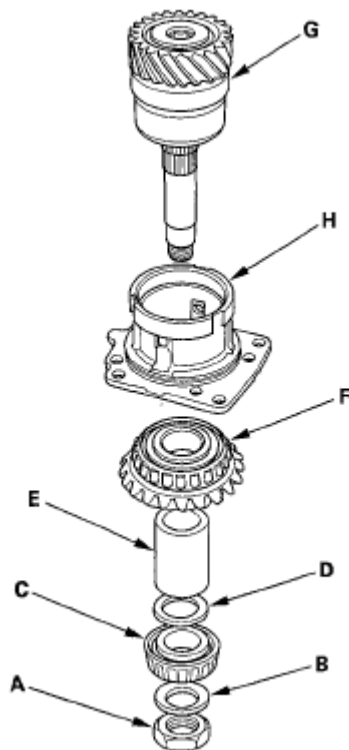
Identifying Transfer Shaft Locknut, Conical Spring Washer, Tapered Roller Bearing And Thrust Shim
